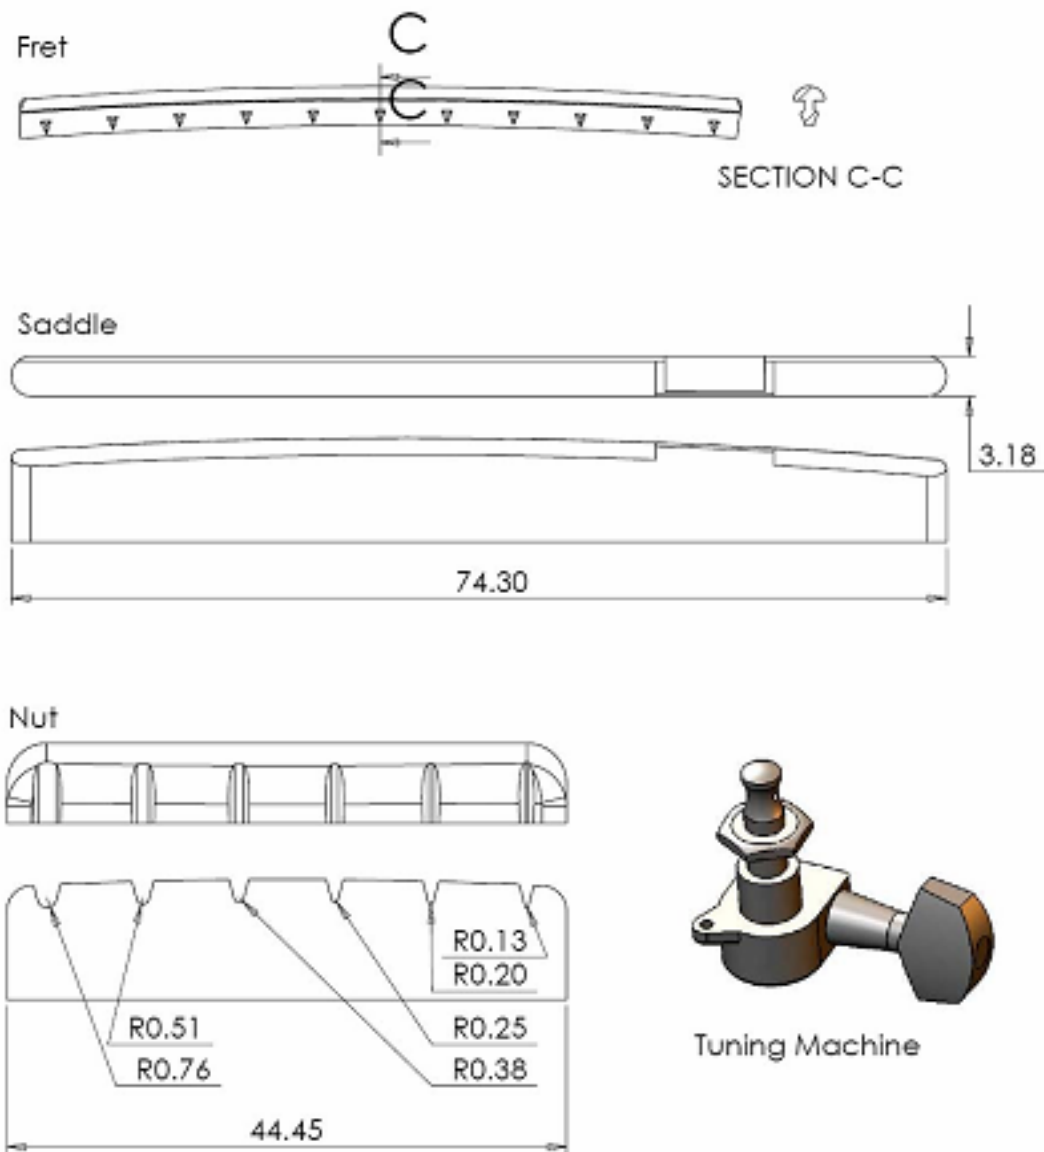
Machine drawings of a fret, saddle, nut and tuning machine.
